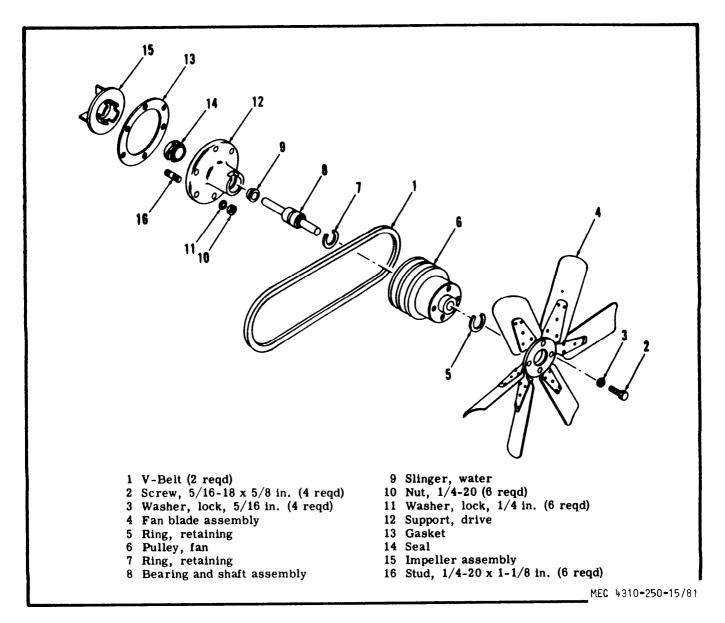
Water Pump and Fan Assembly, Disassembly and Reassembly.
